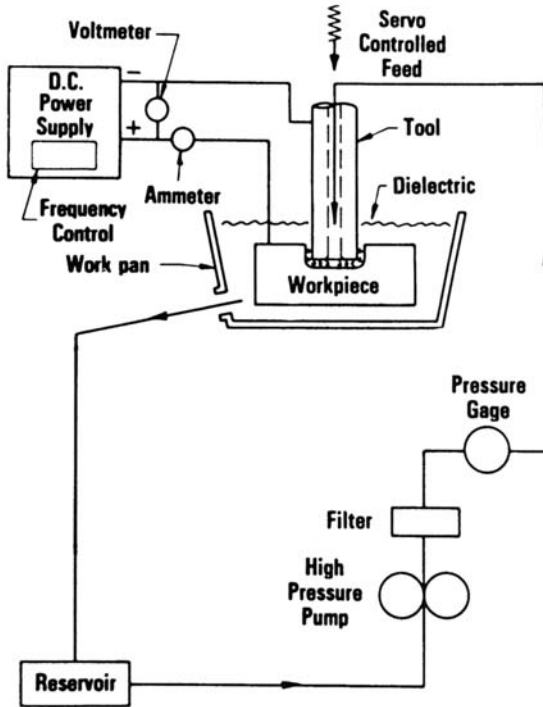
Electrical discharge machining. (Courtesy of Chemform Division of KMS Industries)
